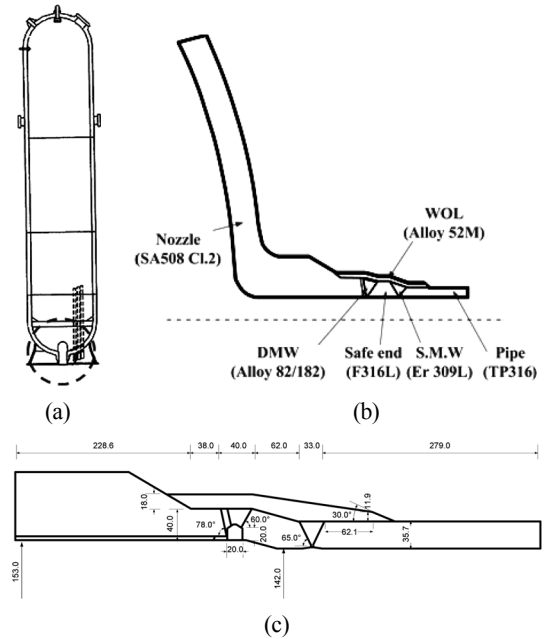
Geometry of dissimilar metal weld in surge nozzle considered in this work
